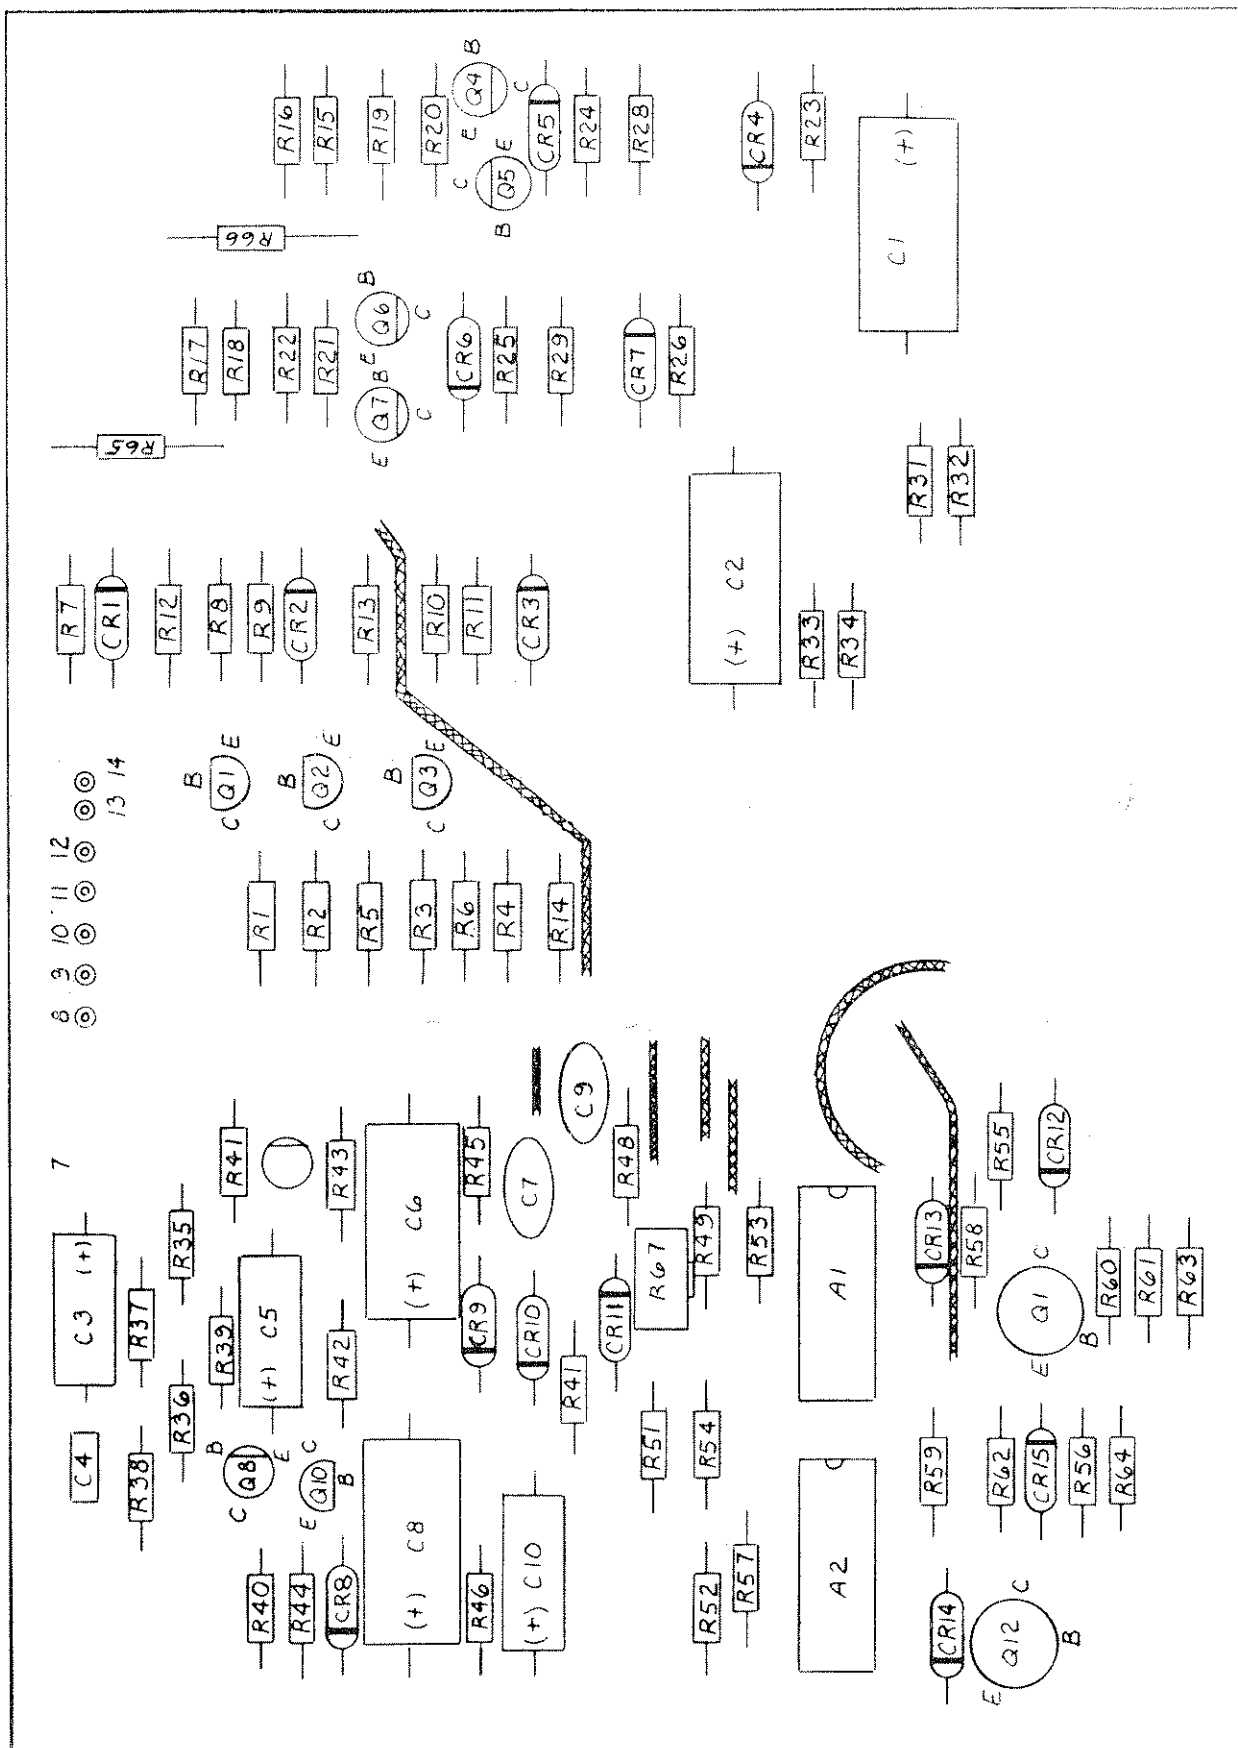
Plug-In Model 305-PA-3001 Cards A3 and A4 Auto Level Board, Parts Location (Drawing No. 101359W)
